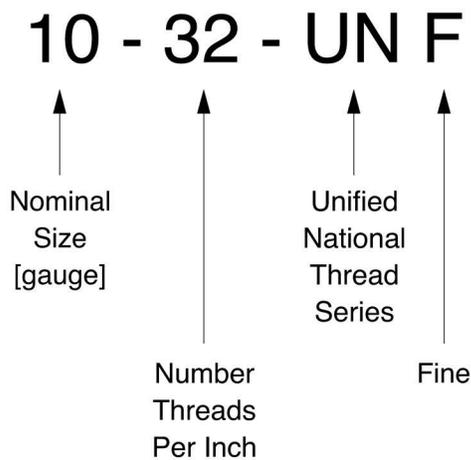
Thread Designation - Nominal Size by Gauge
